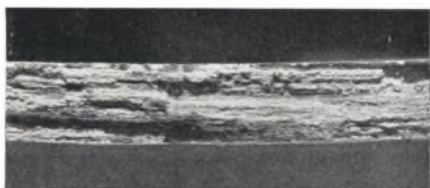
Laminated Fracture of 2-Hole Cylinder. $\times 3$.
